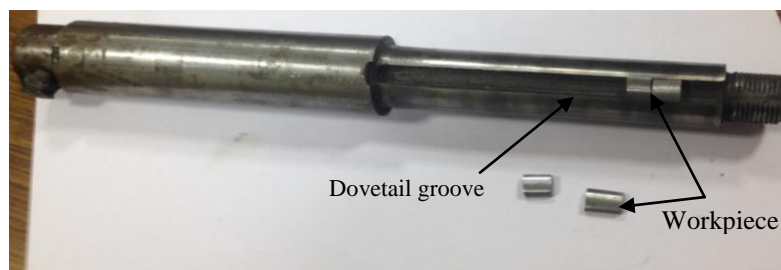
Photograph of cylindrical workpiece with dovetail groove
